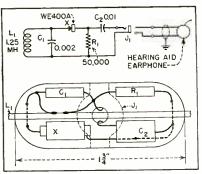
Circuit diagram and drawing showing placement of receiver parts
